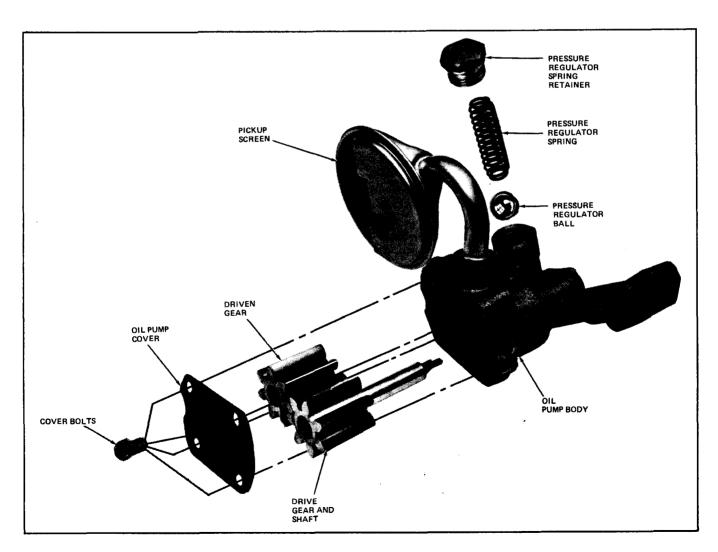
Oil Pump-Exploded View (All Except 307 Engine)
